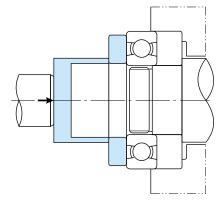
Simultaneous Press Fitting of Inner Ring
